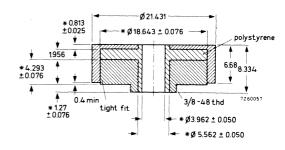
Cross-section of the R.F. choke *See under Fig. 1
